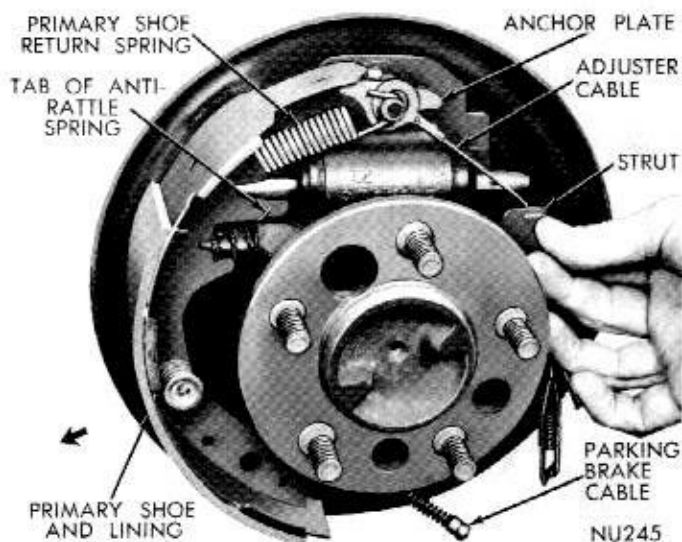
Removing or Installing Parking Brake Strut and Spring (Left Rear)
